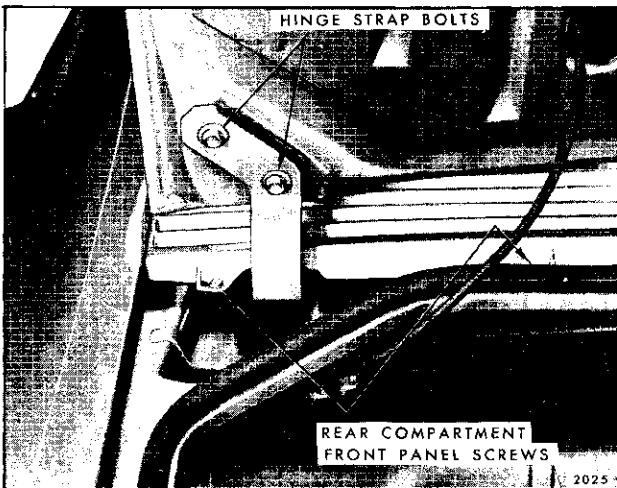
Rear Compartment Lid Attachments - Oldsmobile and Buick "E" Styles
